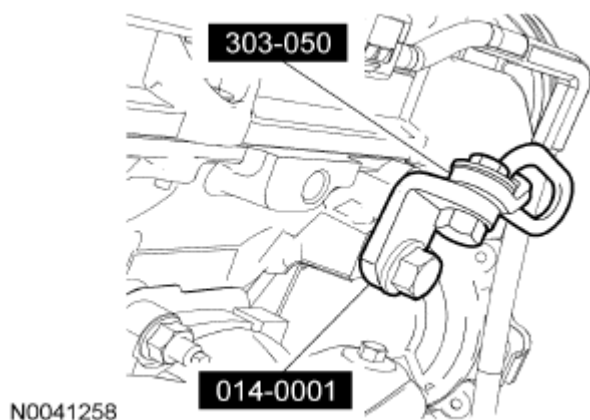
Lifting Bracket To Rear Of LH Cylinder Head
